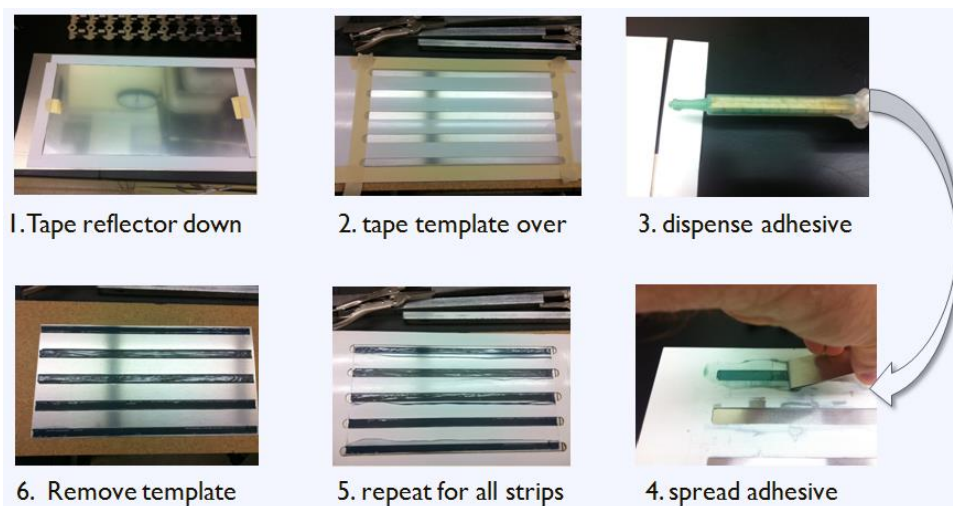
Photos of the assembly sequence used to assemble the MTTs panel candidates.
